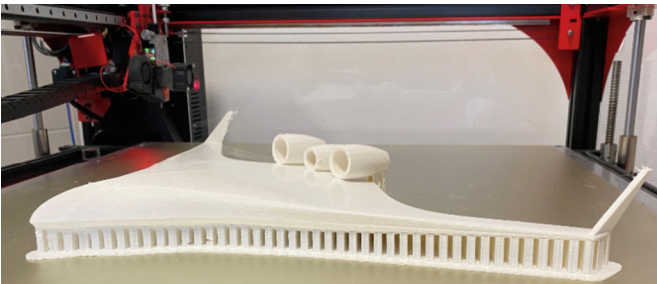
Down-scaled X-48B model manufactured with a Modix Big60v2 FDM machine.
